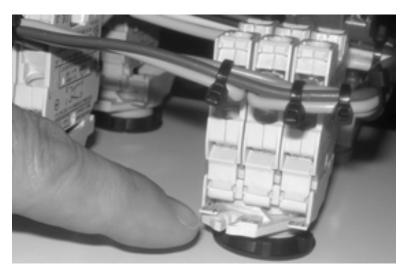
The locking ring shown holds the body of the switch to the front section.
